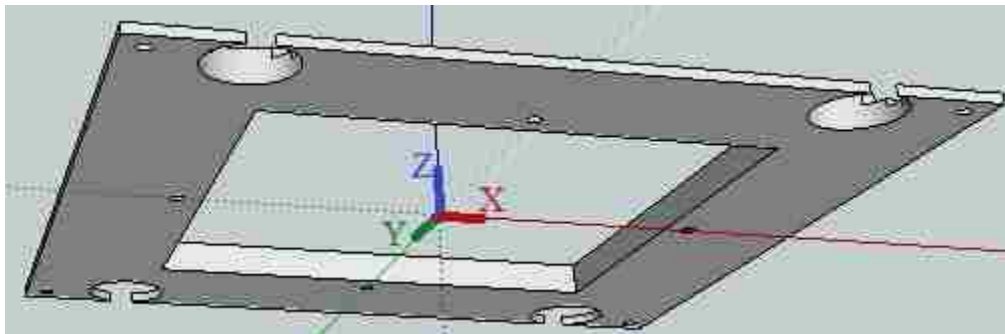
Bottom orthogonal view of the 10x10 cm² middle trimmer lead plate.
